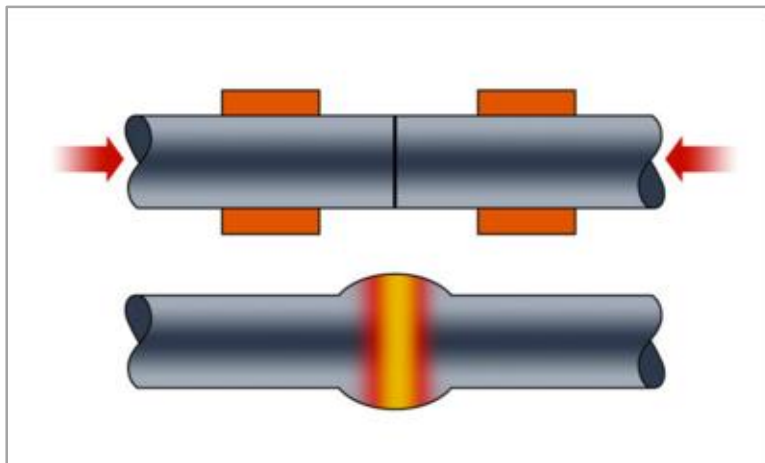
Example set up for flash butt welding process. The top image shows the two wires under compressive force (represented by the red arrows) with a voltage source attached (represented by the orange rectangles). The bottom image shows a heated and bonded weld joint. [11]
